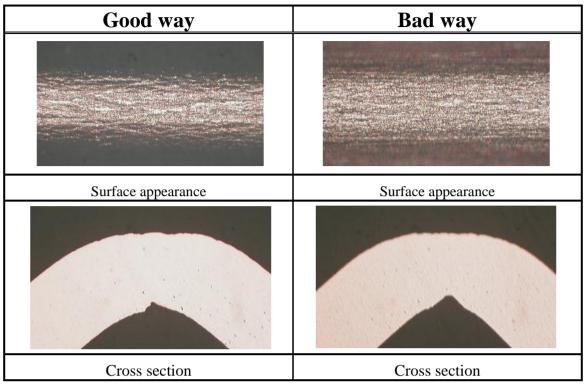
Surface appearances and cross sections of 90° W-shaped bending test specimens. Temper 1/2H , Thickness = 0.2mm , R/t=0 , Width =10mm
